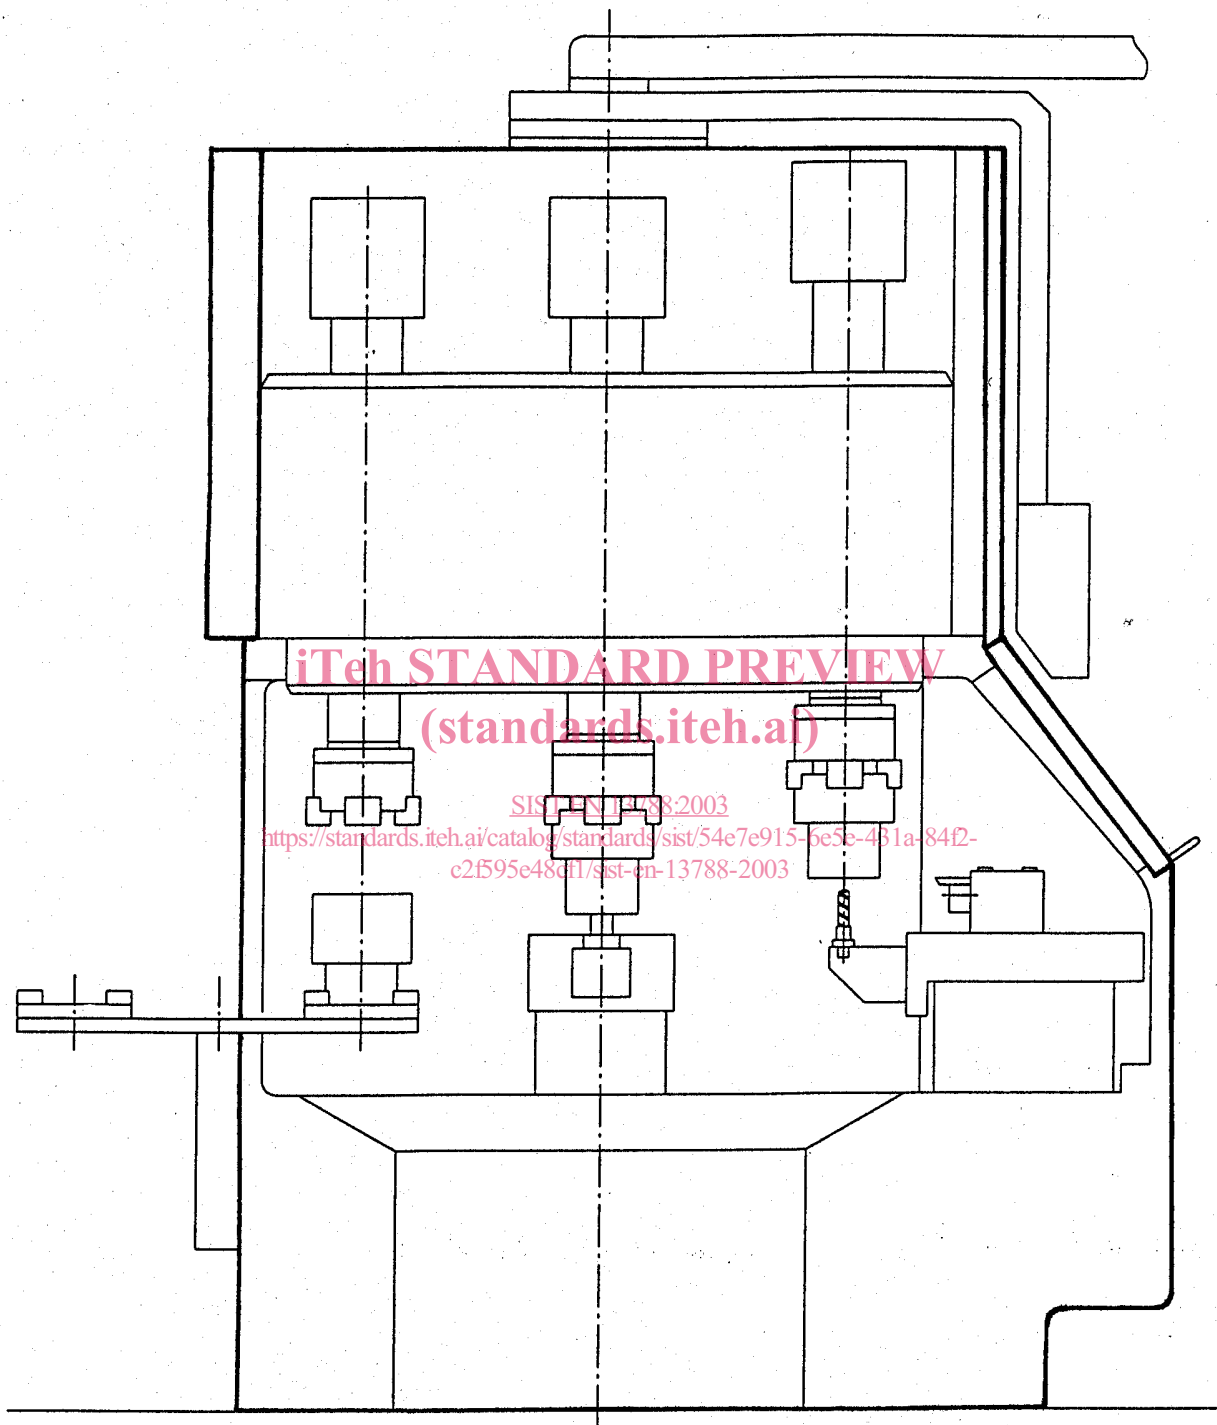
c) — Vertical multi spindle NC turning machine with chuck
